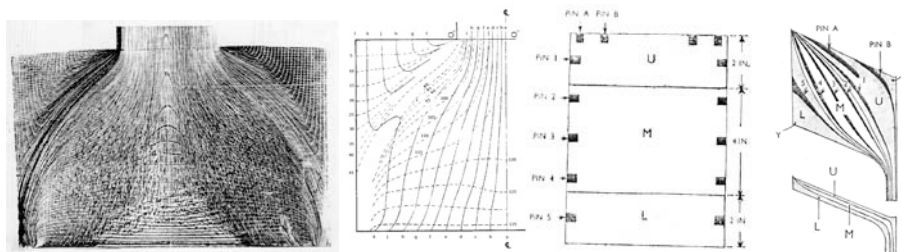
Characterizing metal flow in extrusion; a) Deformed IGP in Al-extrusion, b) Sketch of deformed pattern, c) Marker pins inserted into a Cu-billet and d) Appearance of marker pins in c) after tube extrusion.
